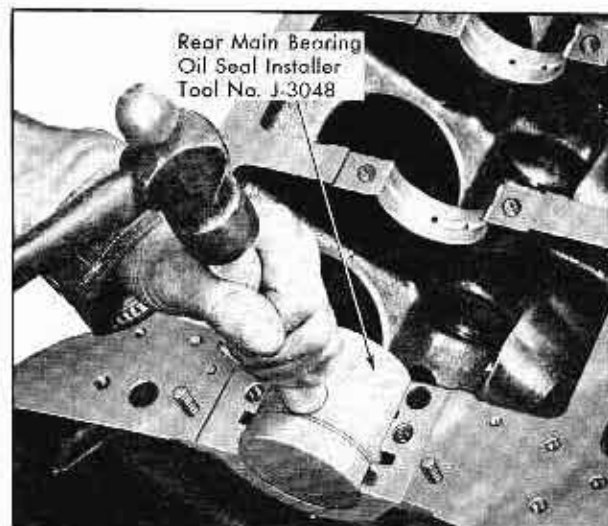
Installing Rear Main Bearing Oil Seal
